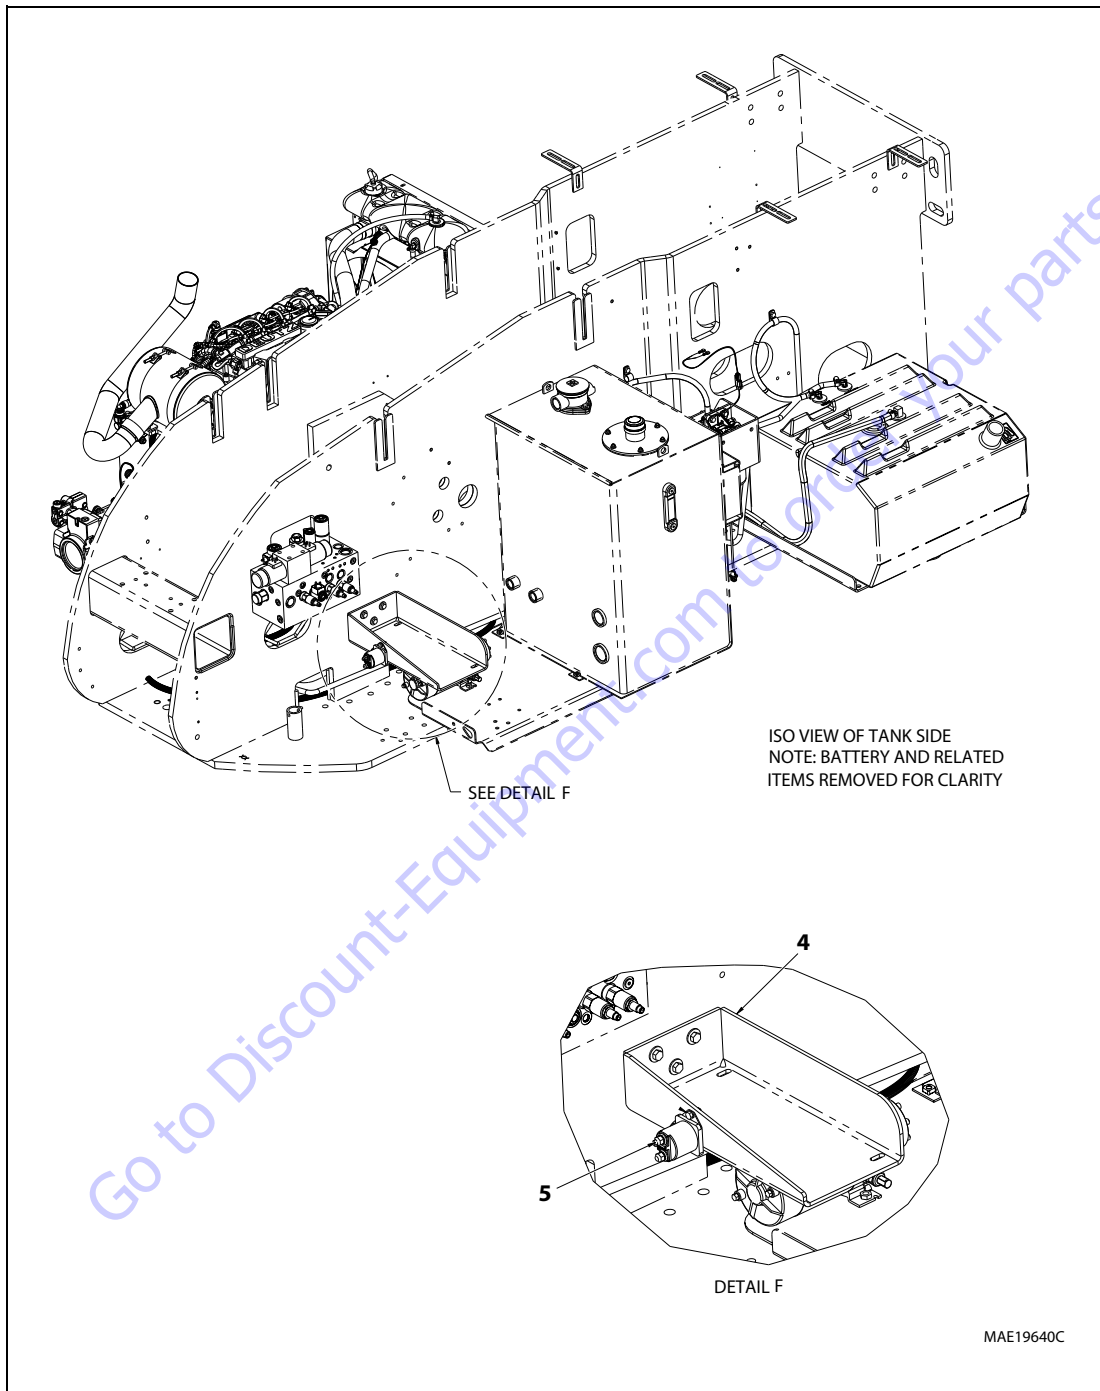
Deutz TD 2.9 L4 China III Engine Installation - Sheet 2 of 6
